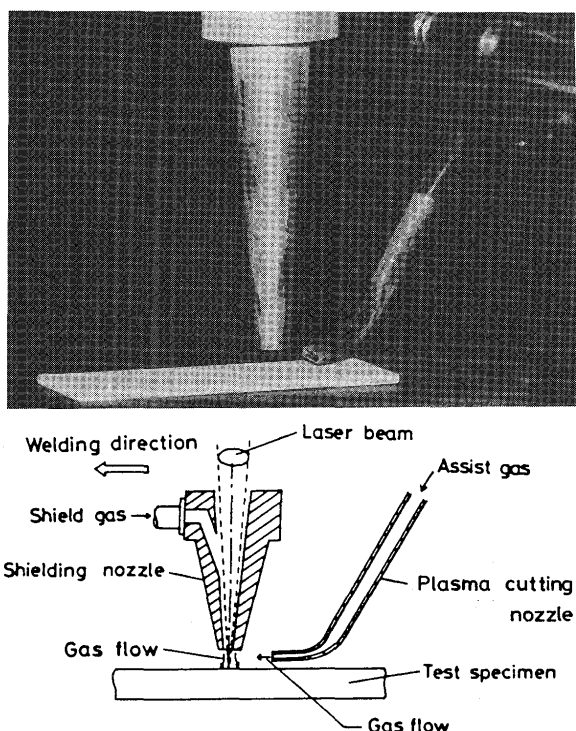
Schematic diagram of plasma cutting nozzle for welding.
